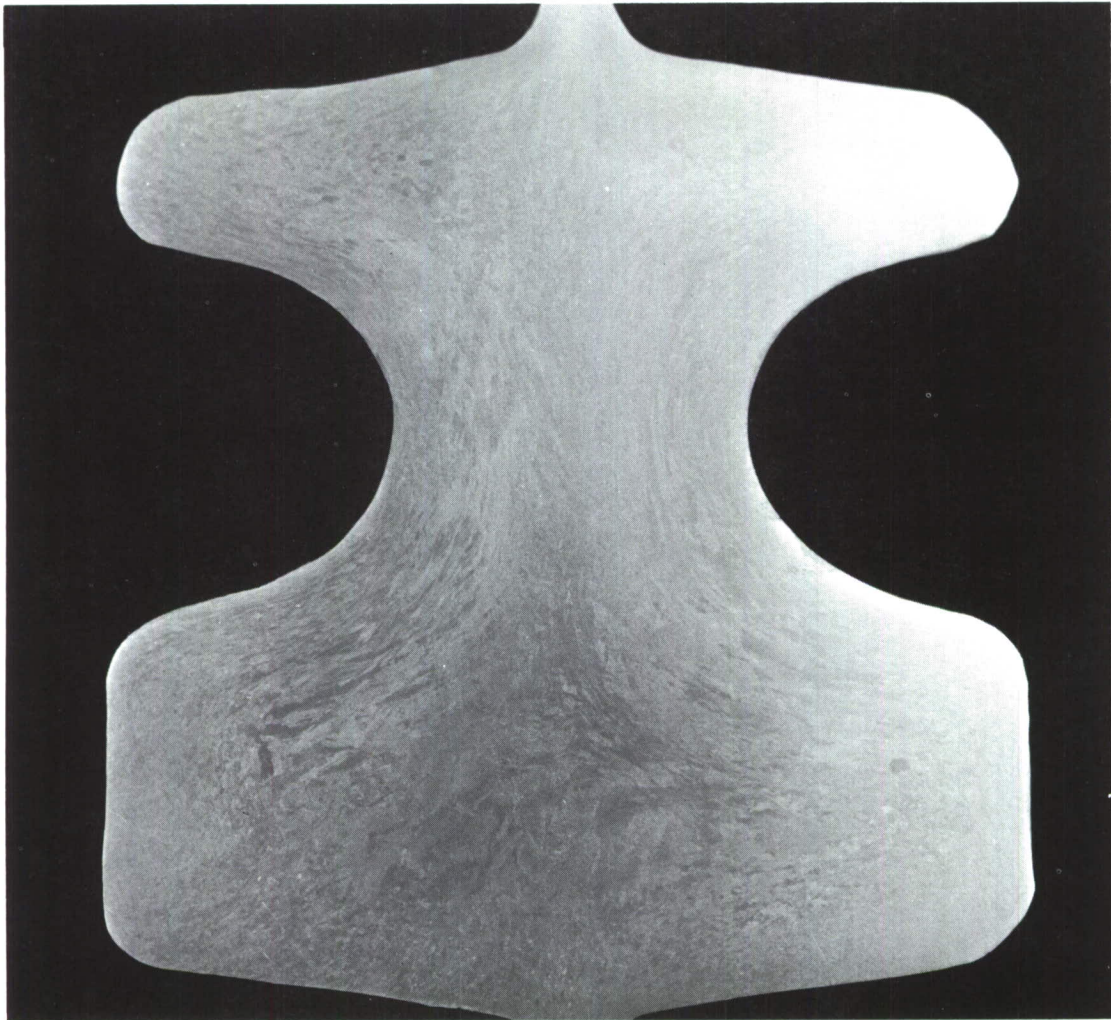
Ti-6Al-4V Transverse Section Through Forging Center Section
